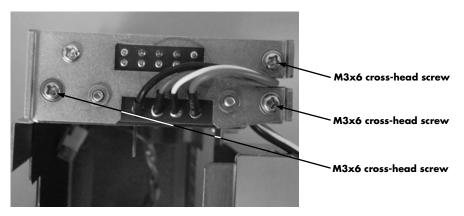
Remove three (3) M3x6 cross-head screws.
